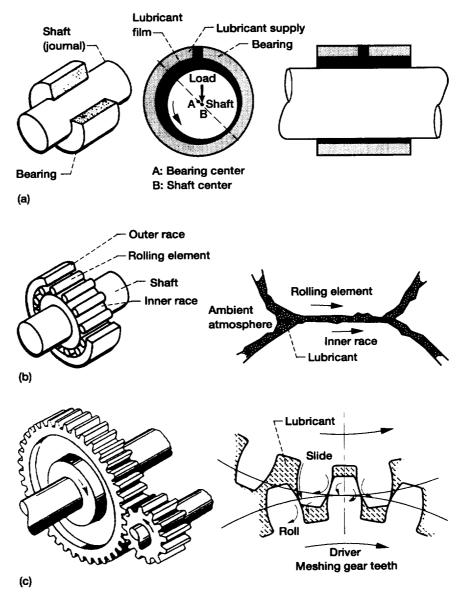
Plain bearings, rolling-element bearings, and gears. (a) Plain bearings based on sliding action. (b) Rolling-element bearings based on rolling action. (c) Gears based on rolling and sliding action.
